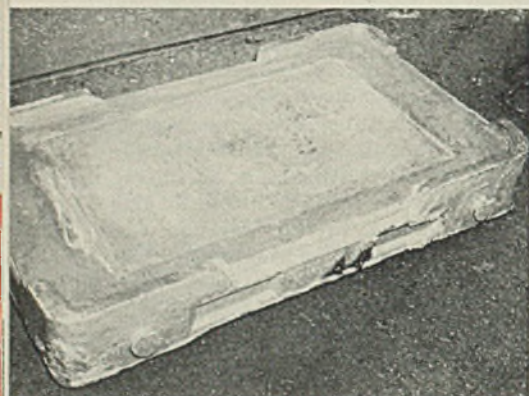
Complete stool showing the insert ready to start its initial campaign
